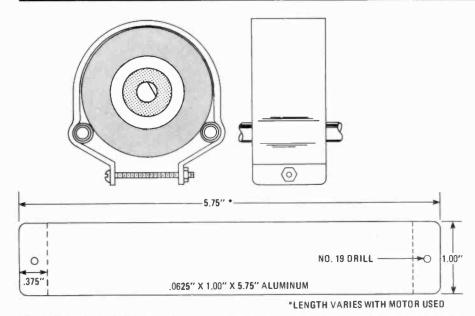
ATTACHMENT OF DC motor to side rods. Clamp dimensions will vary according to the particular motor used.
